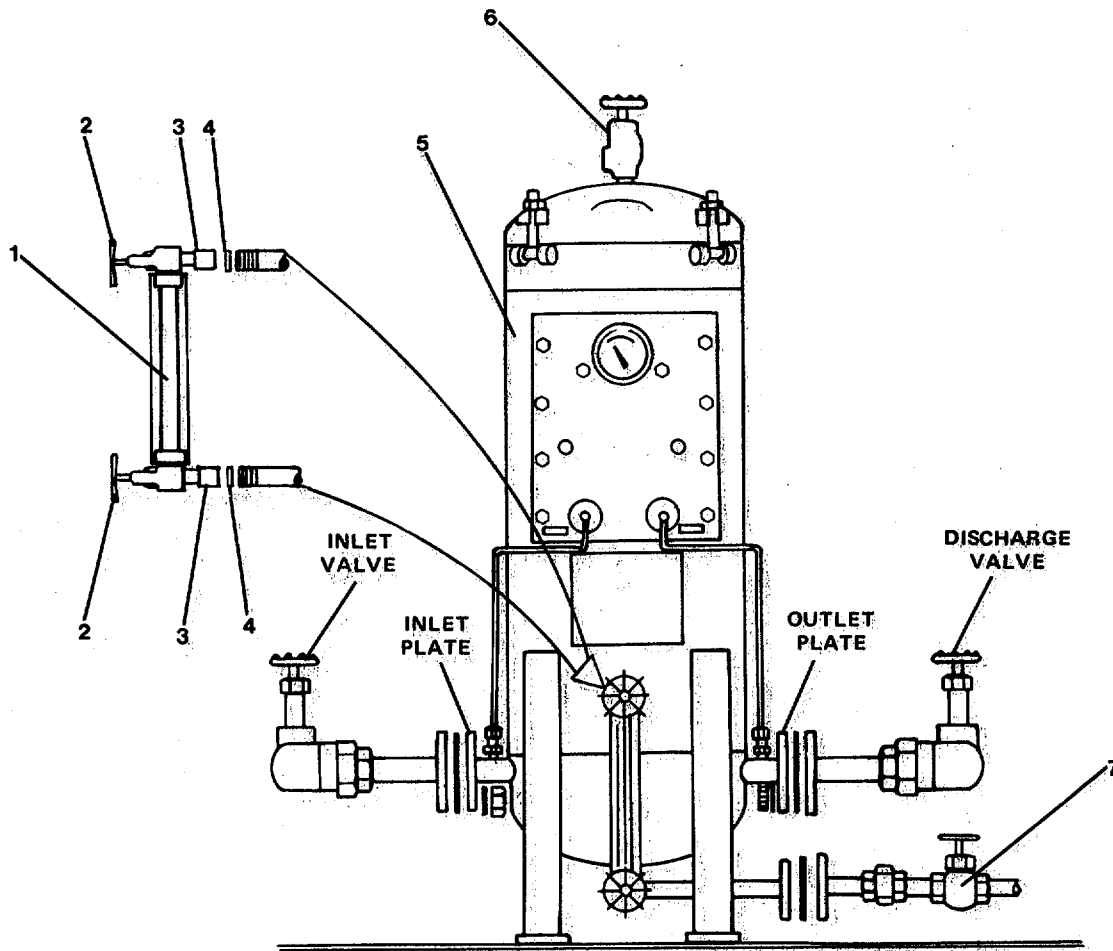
Diesel Fuel Oil Filter/Separator (Sheet 1 of 2).
